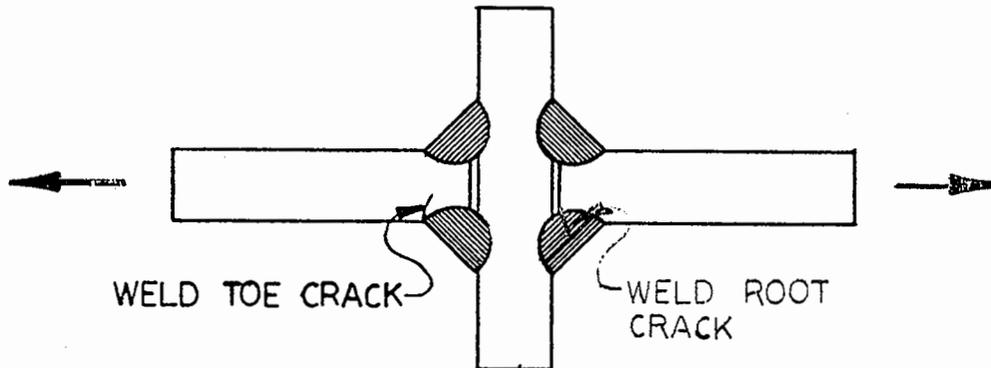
Typical Cruciform Weldment (7)
